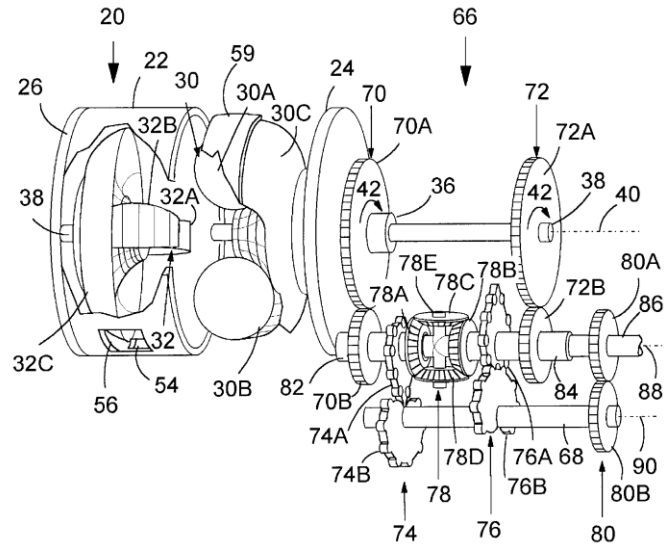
Application of noncircular gears to transmit power from rotors to a common drive shaft (66).
